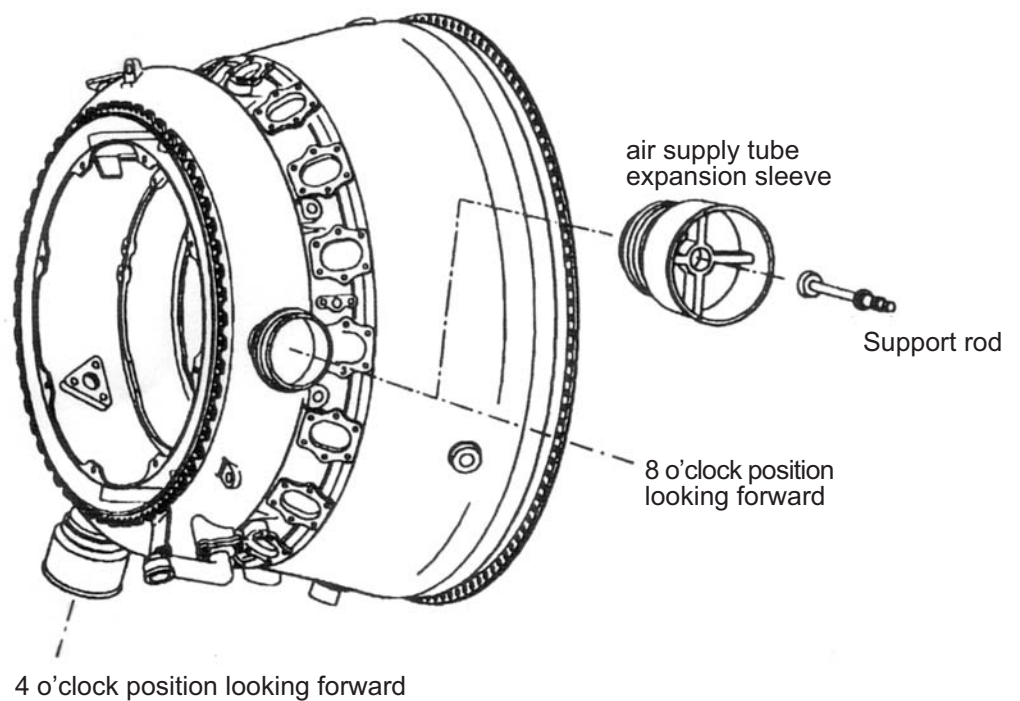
Diffuser case and one air supply tube expansion sleeve and a support rod (broken in the incident engine)
